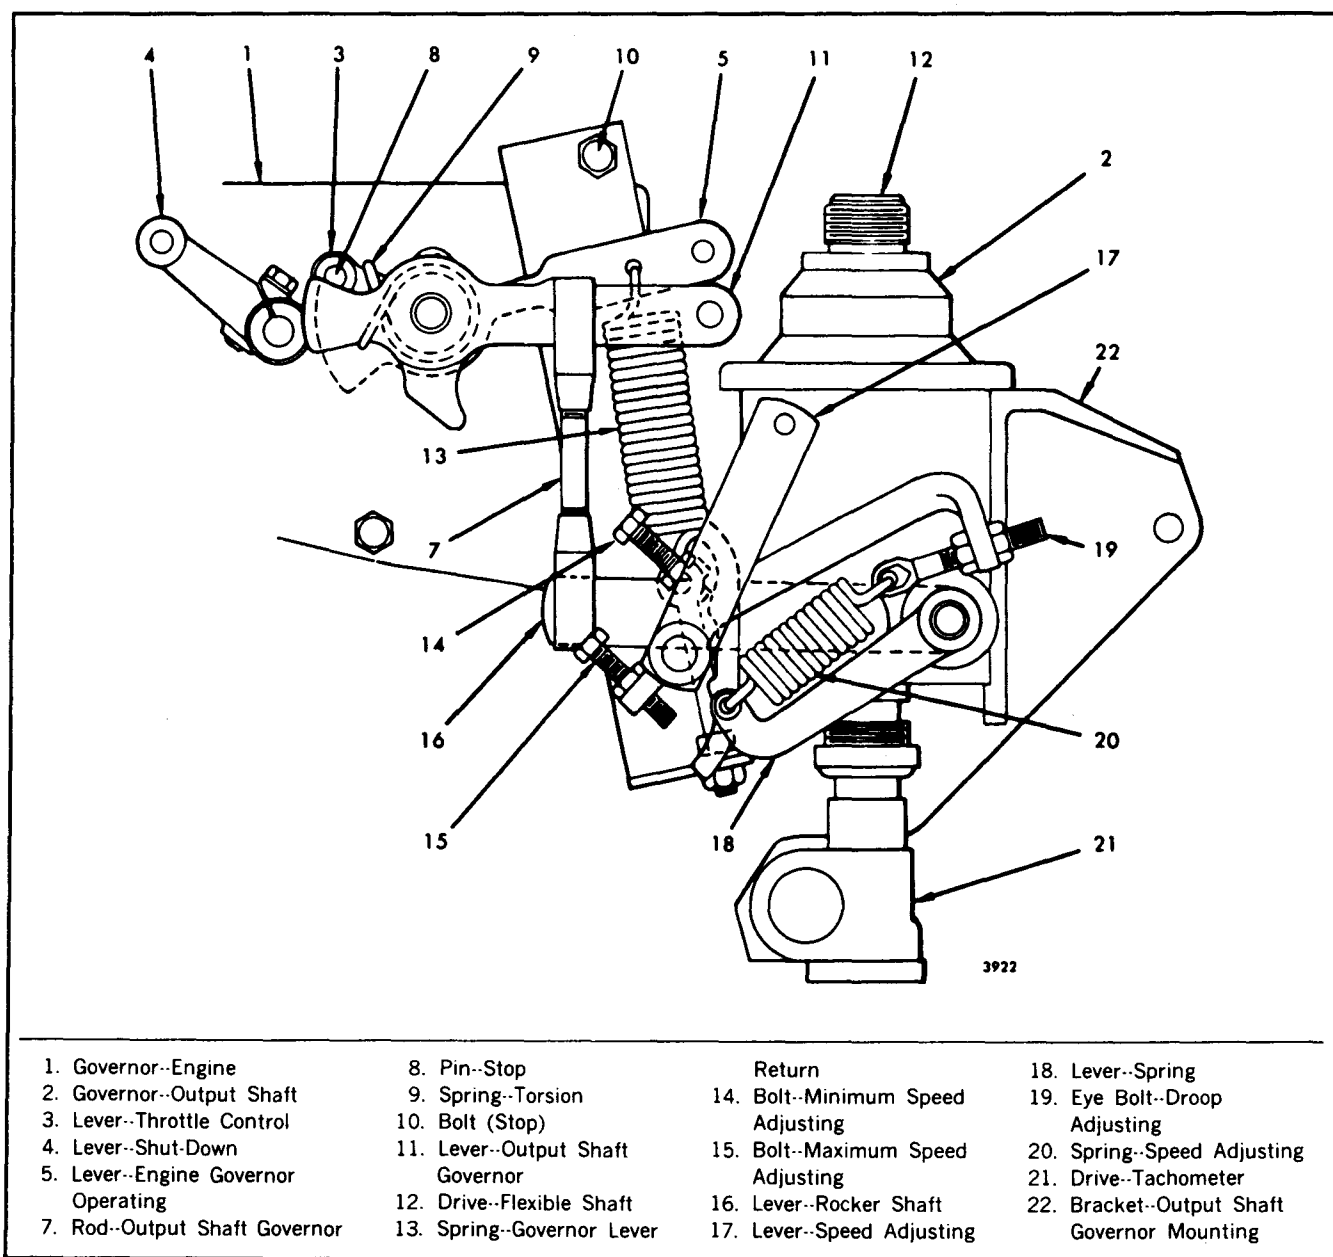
Mechanical Output Shaft Governor and Linkage
